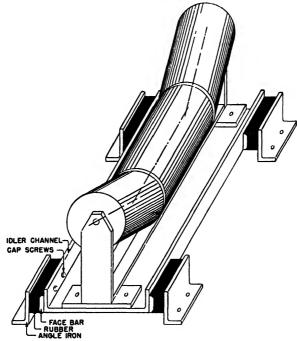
Conveyor-belt idlers arranged to make belt form a trough. The assembly is mounted on rubber suspension units that protect belt from loading shocks. (See Fig. 14.)
